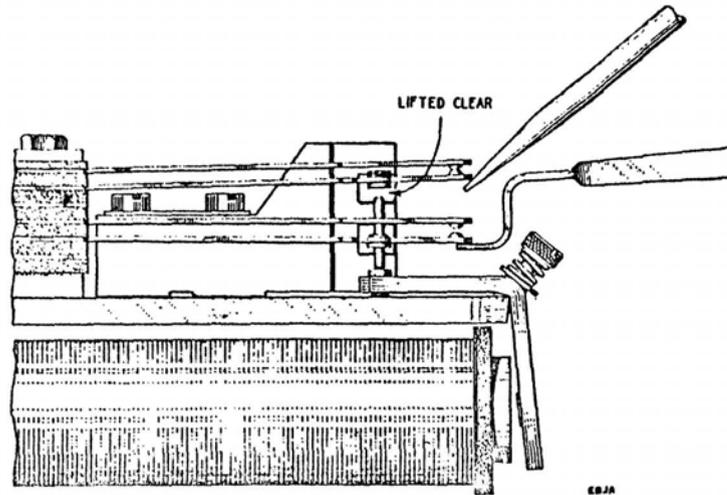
CHECKING LEVER SPRING PRESSURE ('MAKE' CONTACT UNITS)
